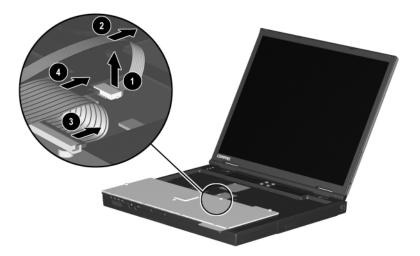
Disconnecting the Keyboard and Pointing Device Cables
